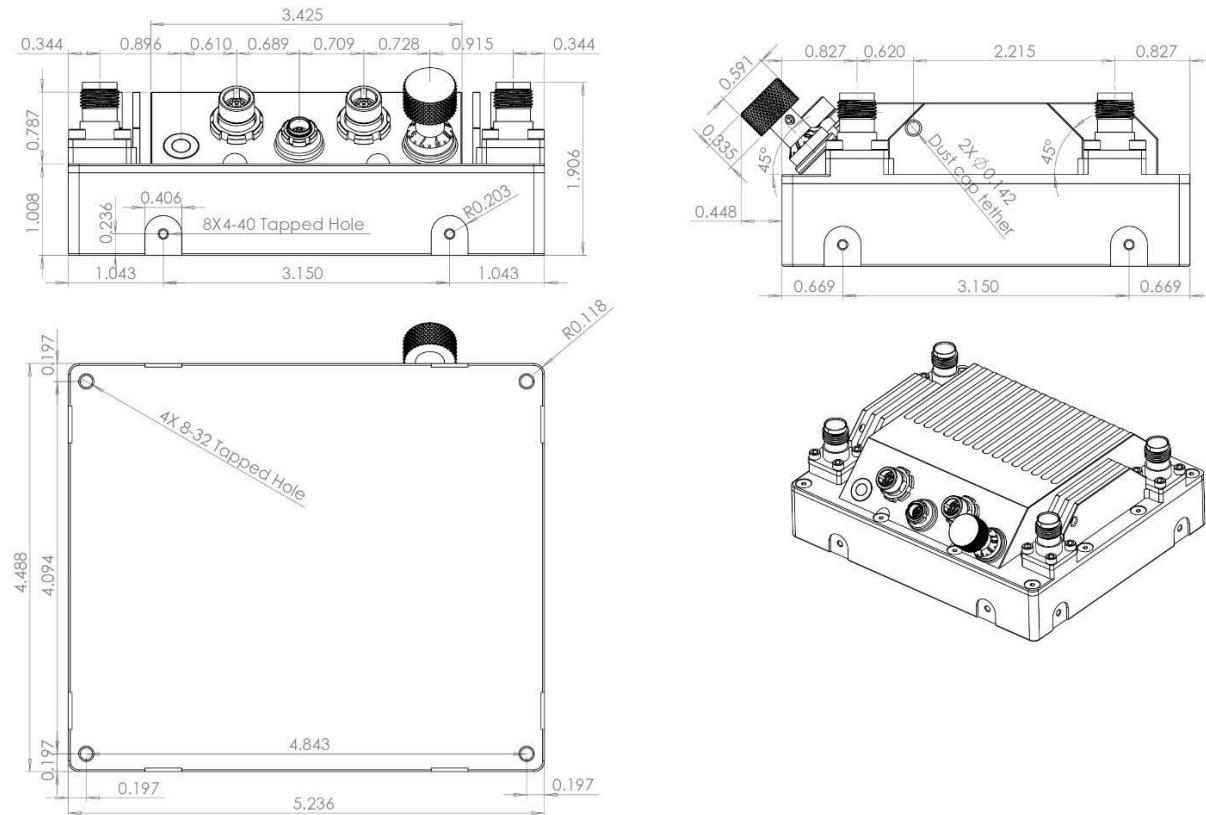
SC4400E Mechanical Drawing (top) and Mounting Pattern (bottom)
